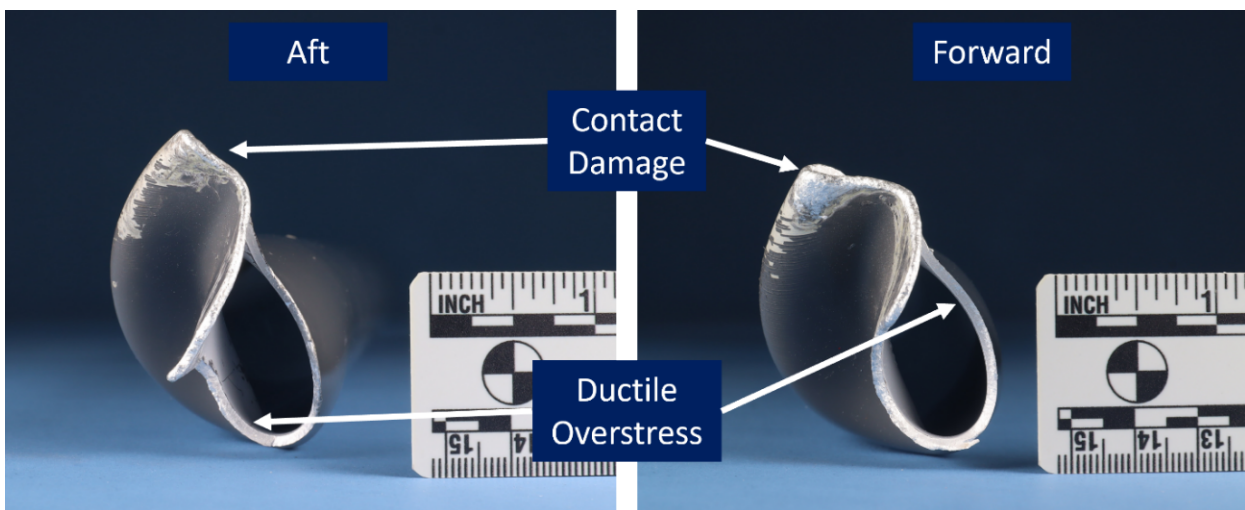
View of the tail rotor driveshaft fracture surfaces
